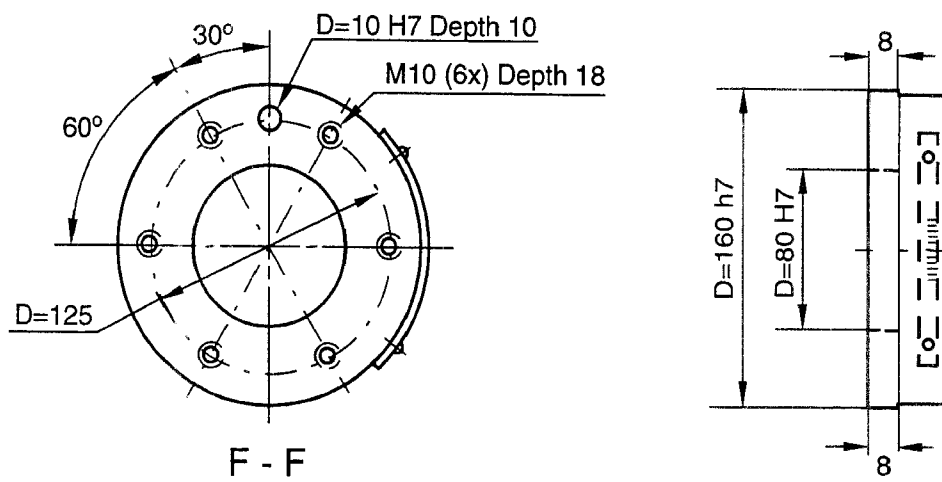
The mechanical interface (mounting flange) ISO 9409. (Dimensions in mm).
